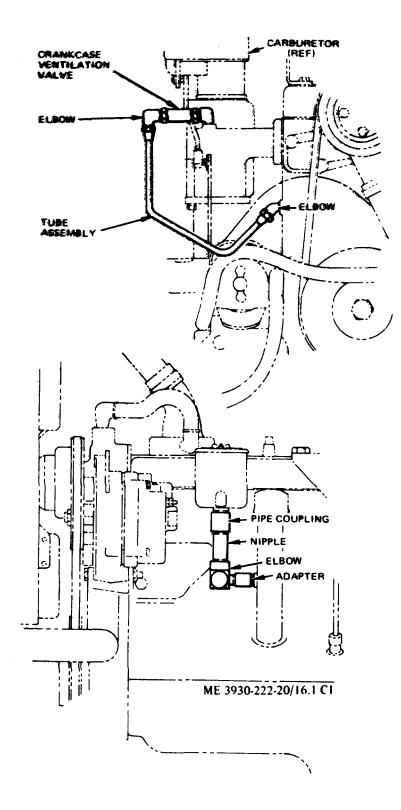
Crankcase ventilation valve and related parts (Army Model MHE-223)
